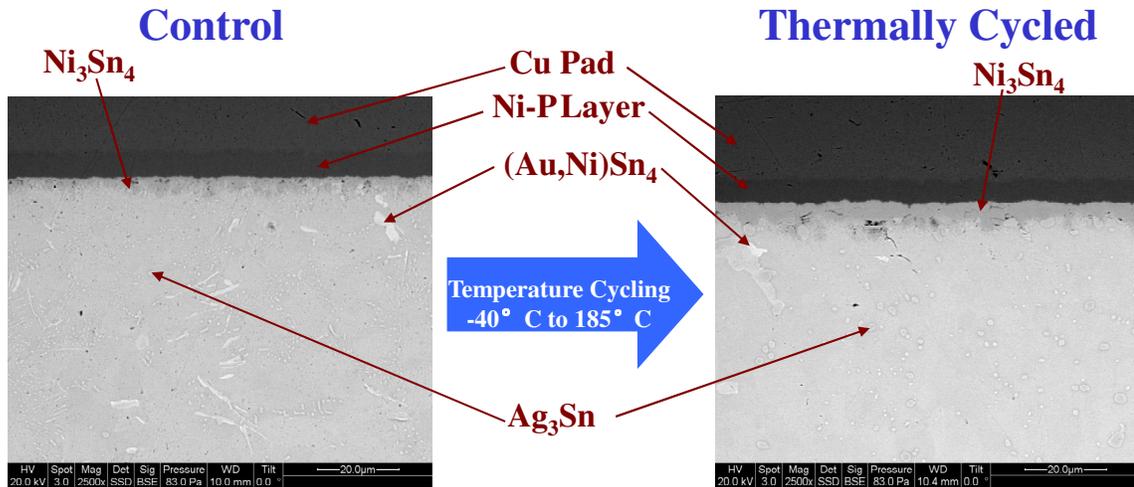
IMCs at package-solder interface in ENIG finished Sn3.5Ag soldered 144 I/O BGA (a) Control (b) Tested (courtesy: CALCE)
